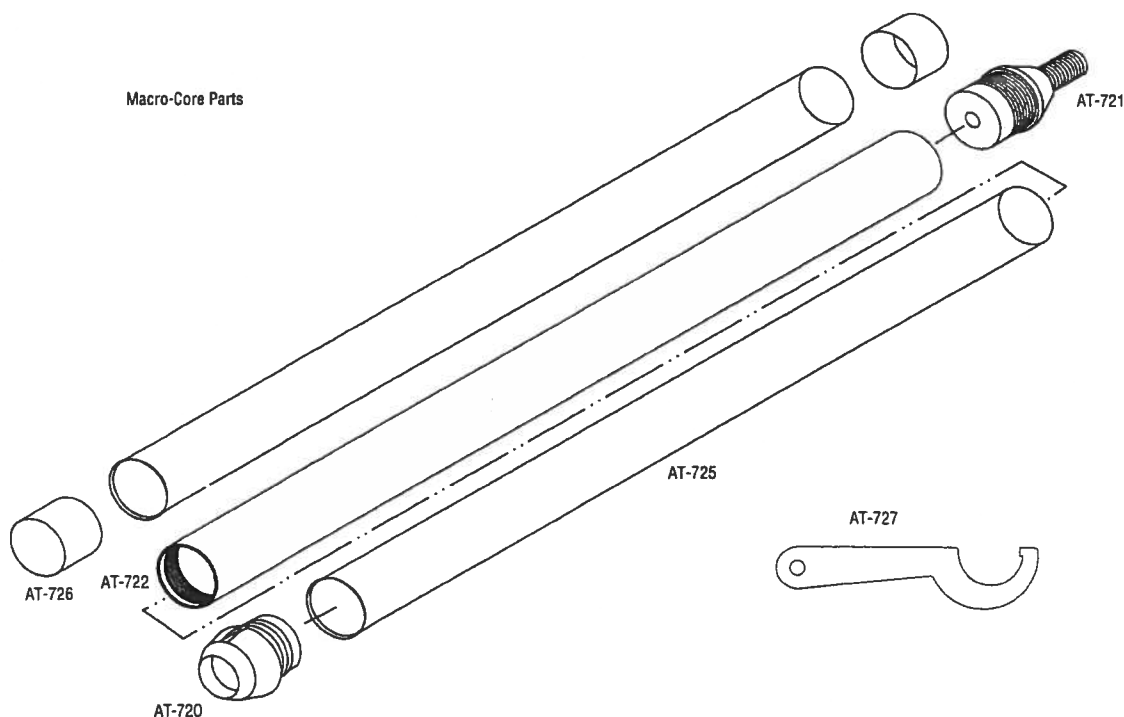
Soil Sampling Tools – Probe Drive System/Large Bore
